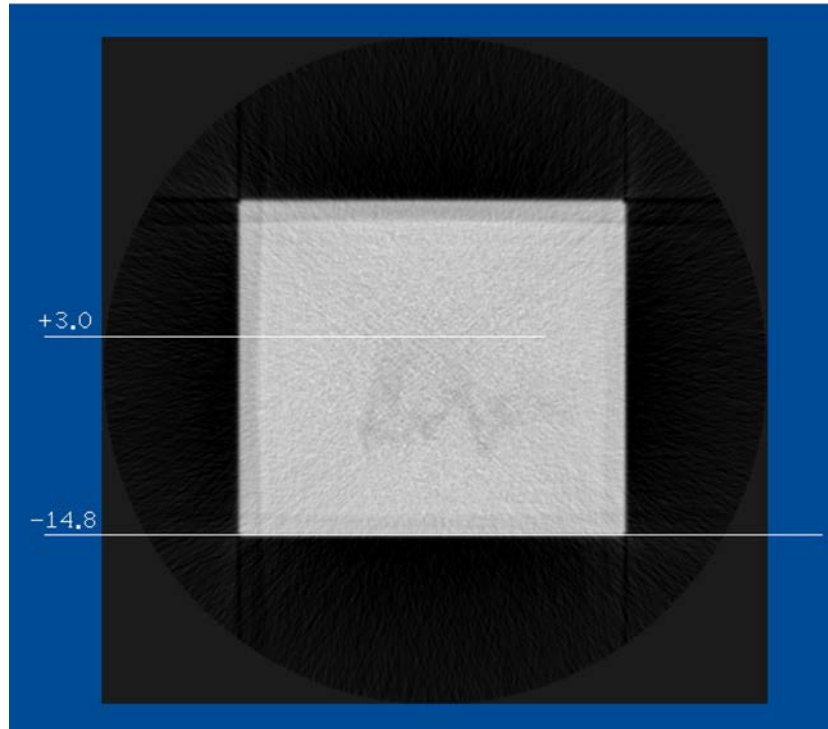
CT-slice #06 ($z=107.40$ mm) of test block P30 (N 220 AD U 7), crack depth: 17.8 mm (+/- 2 pixel = 0.24 mm), 58.7% of weld thickness
